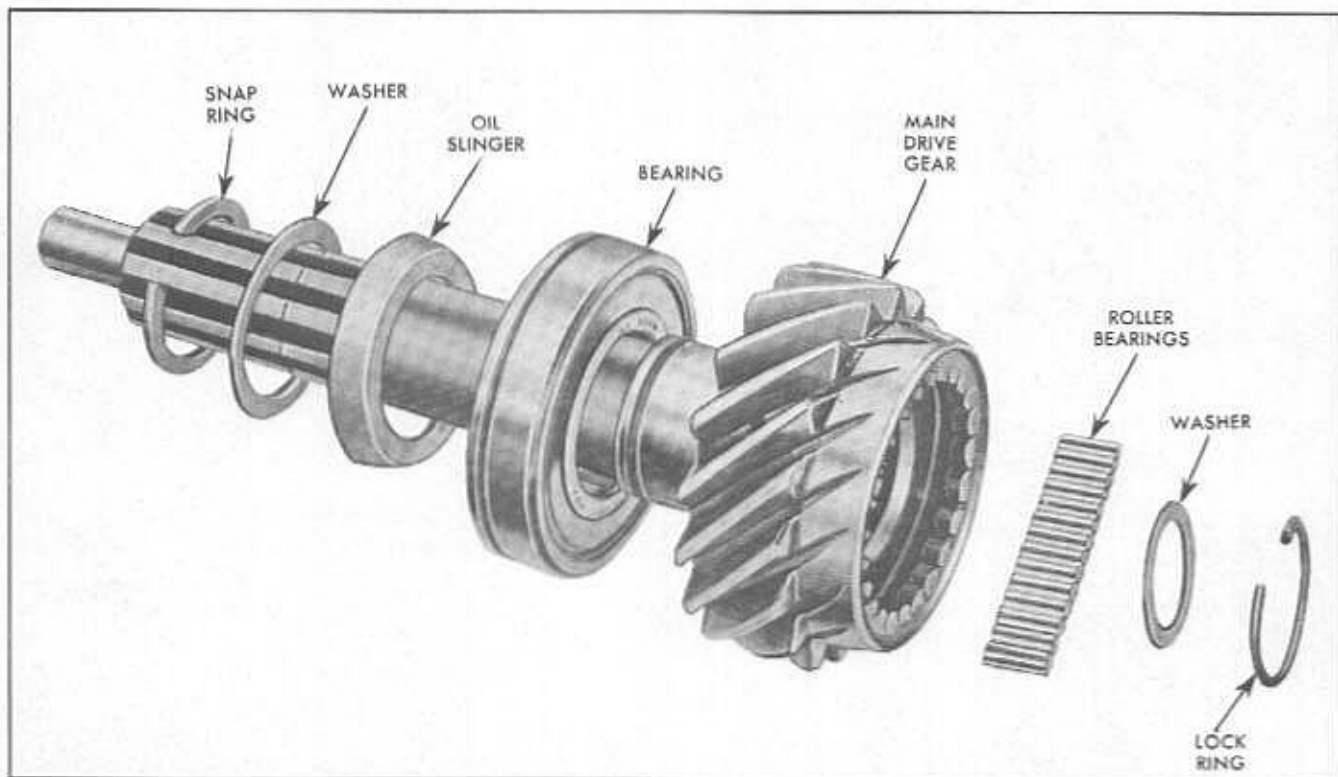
Main Drive Gear and Front Bearing Assembly
